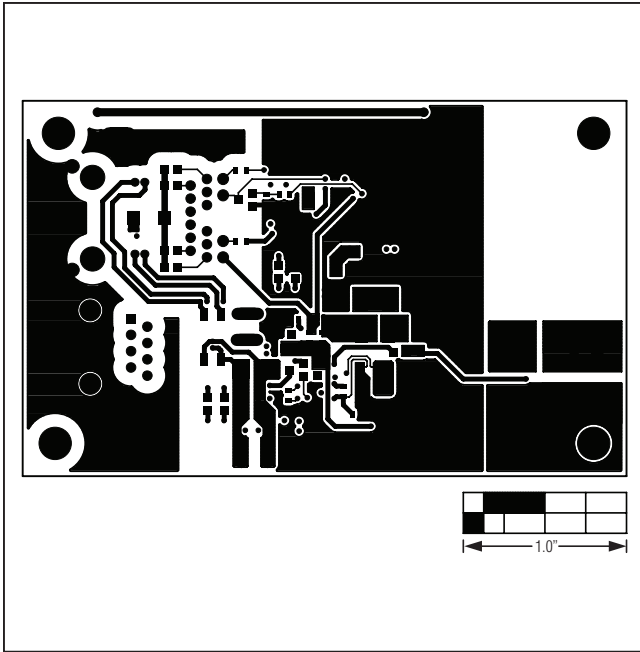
MAX5974E EV Kit PCB Layout—Solder Side
